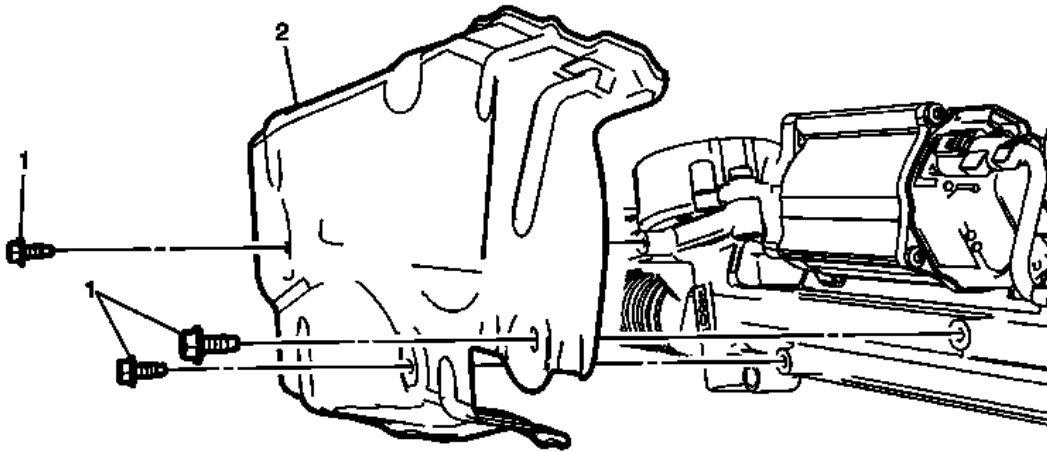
Steering Gear Heat Shield And Bolts (NJ1)
